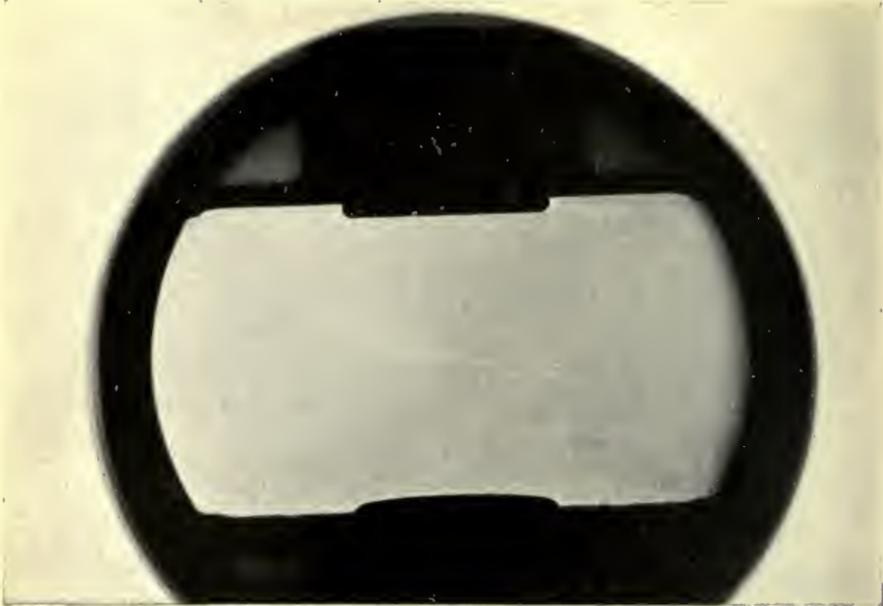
Radiograph of aluminium piston of aeroplane engine, showing crack.
